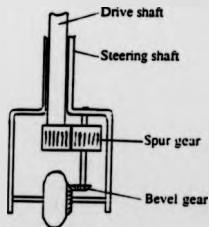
Diagram showing drive and steering subsystem meshing through the spur and bevel gears.
